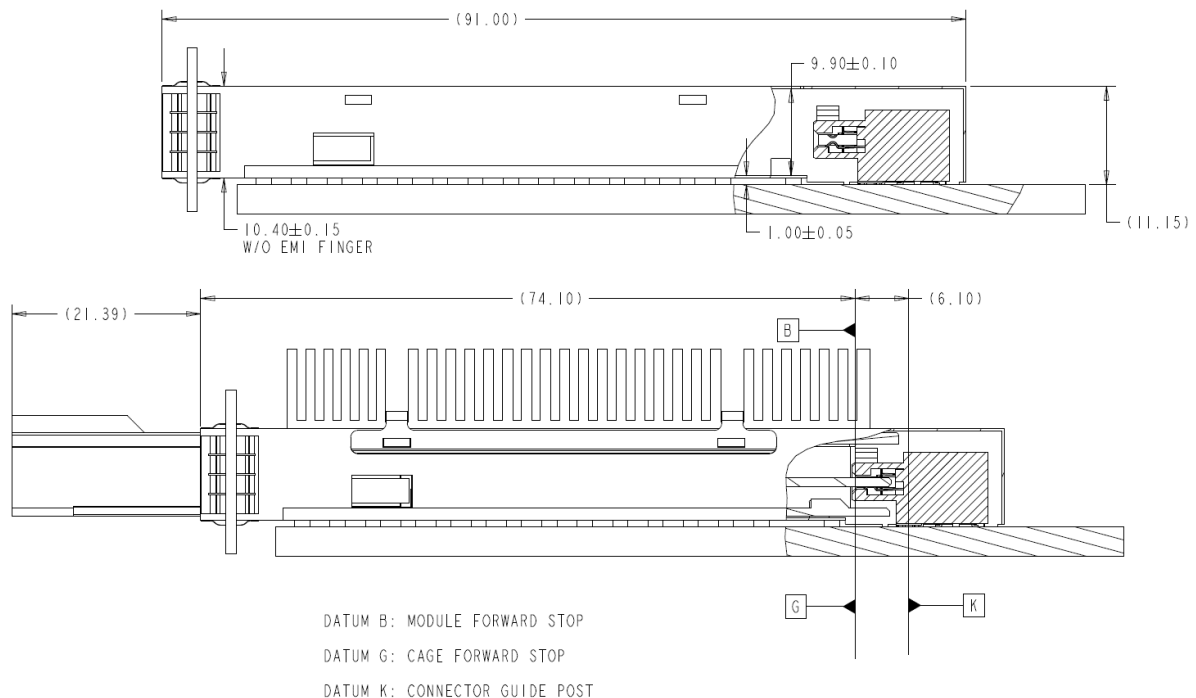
Side view of a 1x1 cage with vertical cage dimensions
